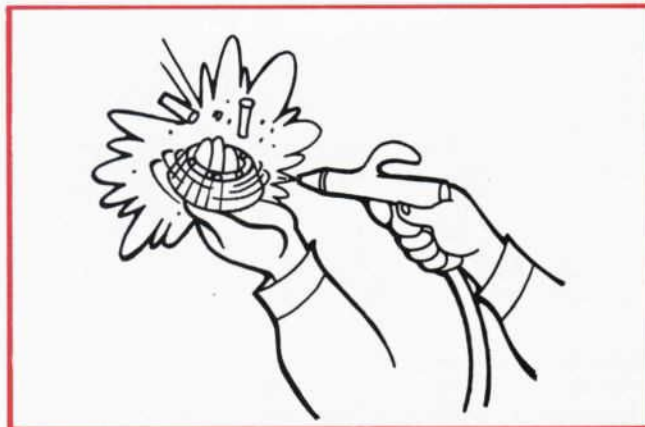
Using compressed air to “spin dry” bearings is DANGEROUS. The bearing may shatter and throw jagged pieces in all directions. The safe way is to let it air dry.
